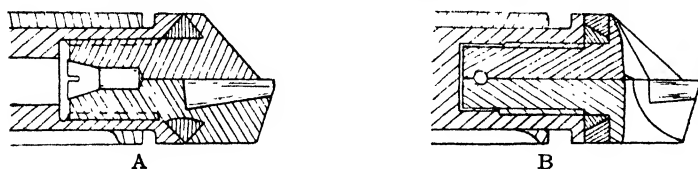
A and B.—Two other forms for setting diamond formed according to Fig. 168 in tool holders
